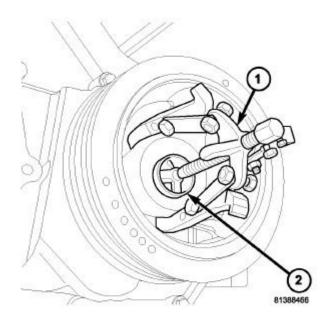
CRANKSHAFT DAMPER REMOVAL Courtesy of CHRYSLER LLC
